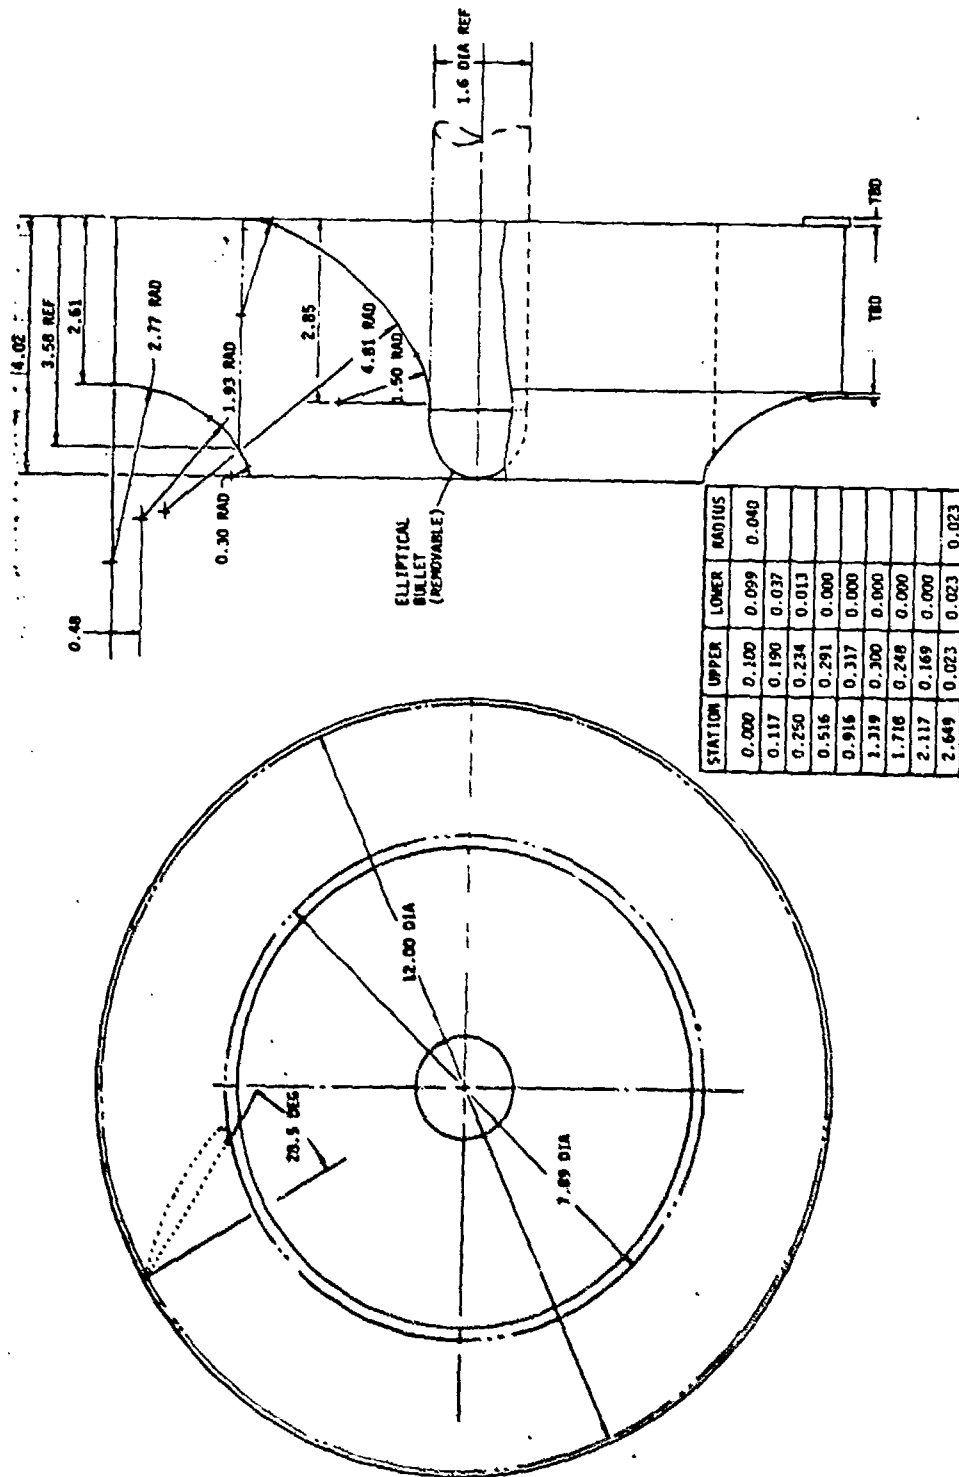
BELL LINES DRAWING OF 12-INCH-DIAMETER JEFF(B) MODEL IMPELLER
